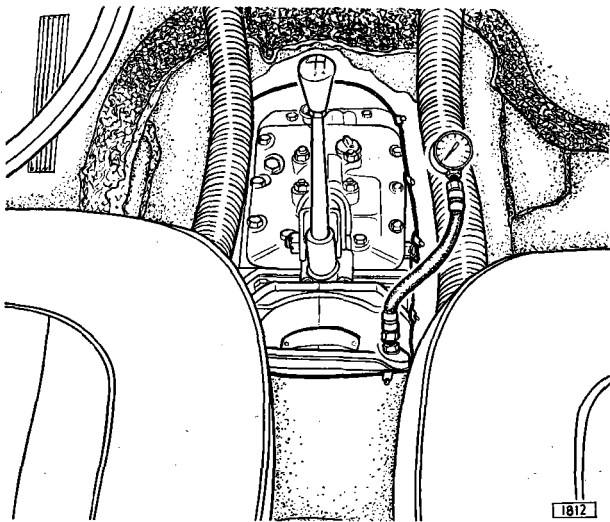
Checking the overdrive hydraulic pressure utilising the Churchill tool No. L.188
